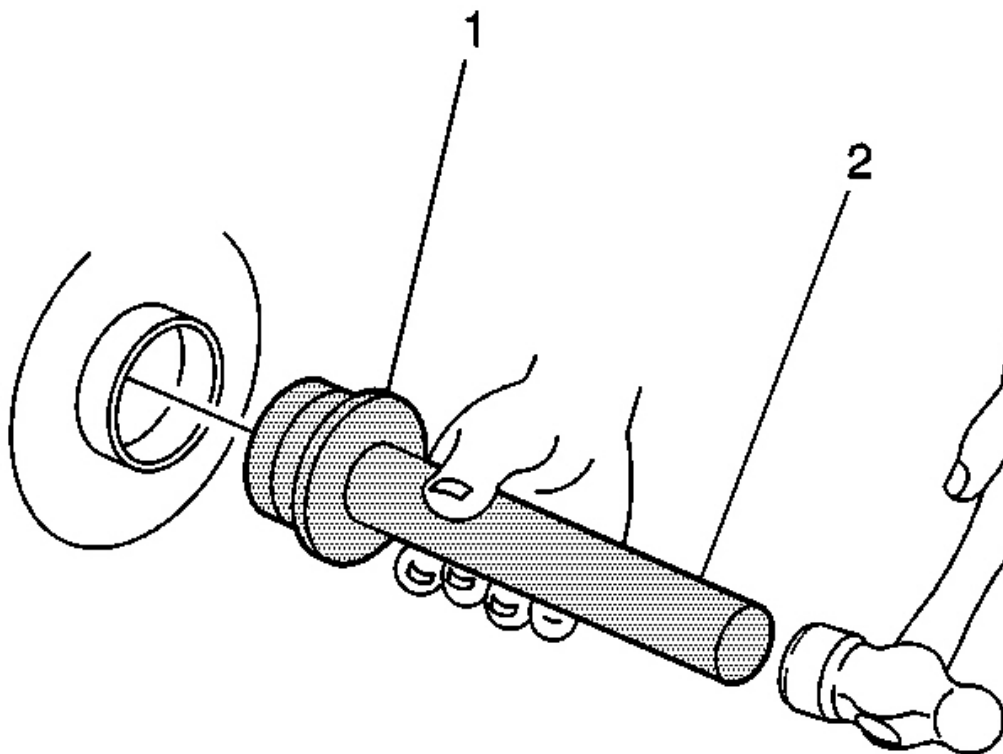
Installing The Axle Shaft Bearing Using J 23690 Or J 29709 & J 8092
